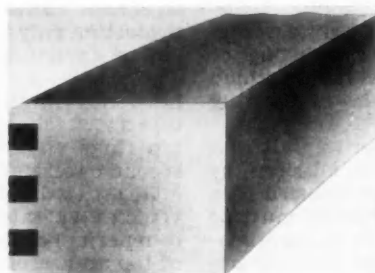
The face of this ring was grooved and filled with magnetic iron oxide.
